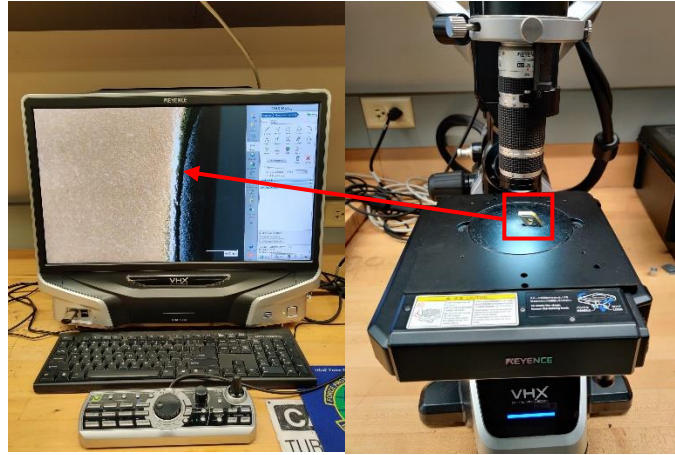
Tool wear measurement set up using VHX-5000 Optical Microscope
